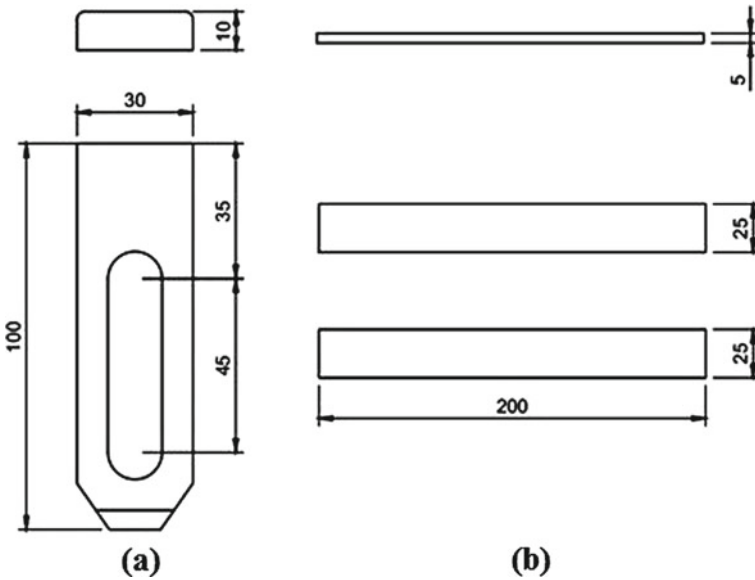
a Clamping device and b the support plate (all dimensions in mm)
